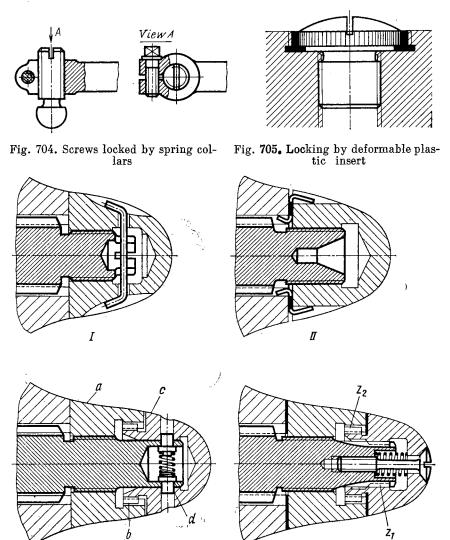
Methods for locking cap nuts and form nuts on shafts of centrifuge-type machines
